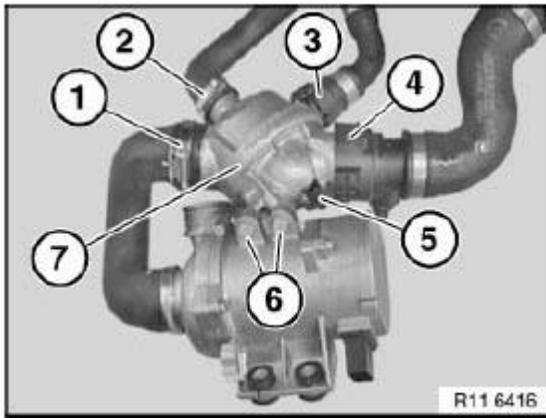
Identifying Hose Clamp And Coolant Hoses
